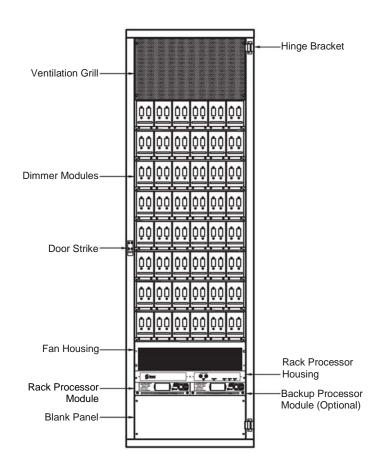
EC21 Dimmer Rack (Door Removed for clarity)
